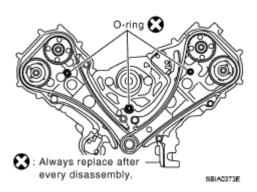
Identifying O-Rings Location Courtesy of NISSAN MOTOR CO., U.S.A.
